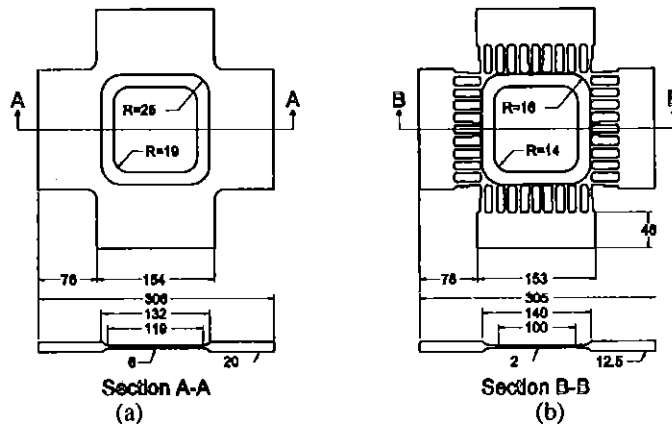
General dimensions of a) near-net shape specimen blank and b) test specimen.
